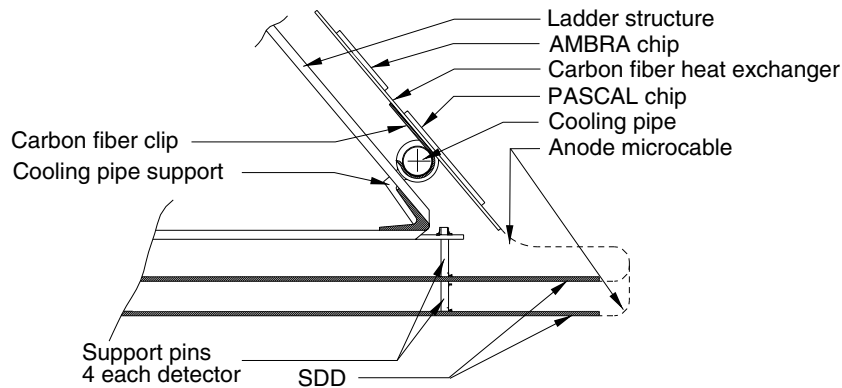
Cut-view of the ladder cross section showing the front-end micro-cables and the cooling tube.
